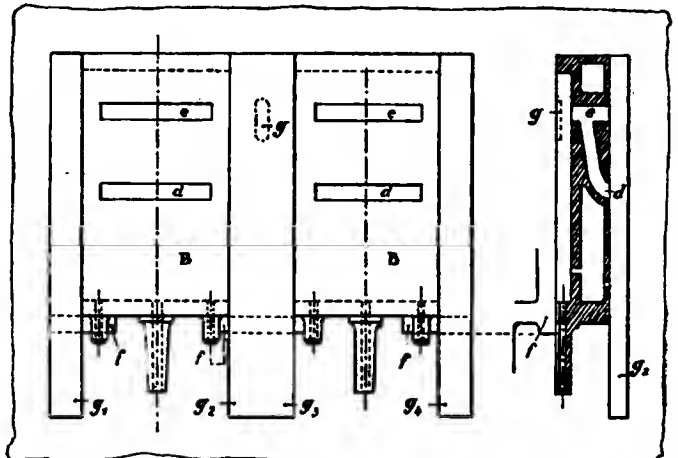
Face view and section of distributor-box B for a pair of cylinders—g, g', are spurs for additional guiding of valve plates
